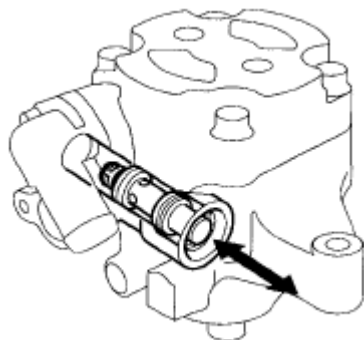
Identifying Pressure Control Valve On Pump Housing
